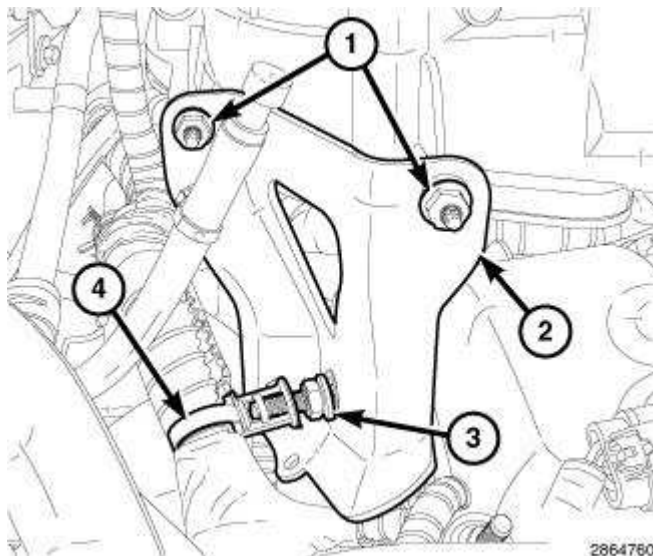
Upper Intake Manifold Support Bracket, Stud & Fasteners
